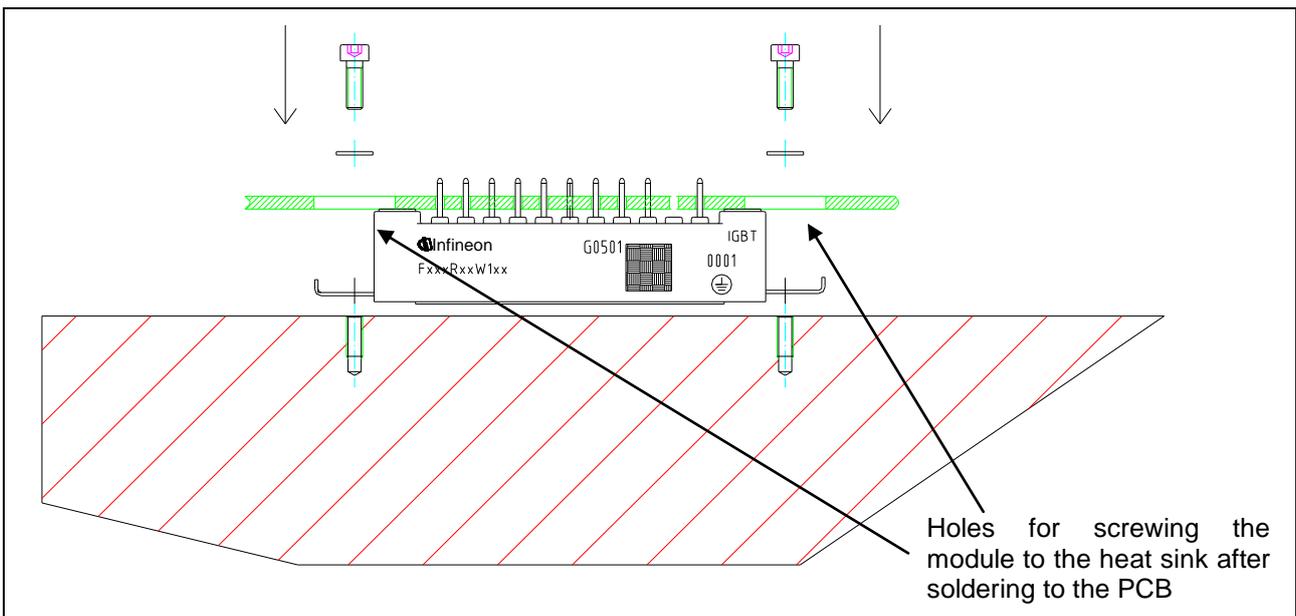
Mounting of the module onto the heat sink after soldering into the PCB
